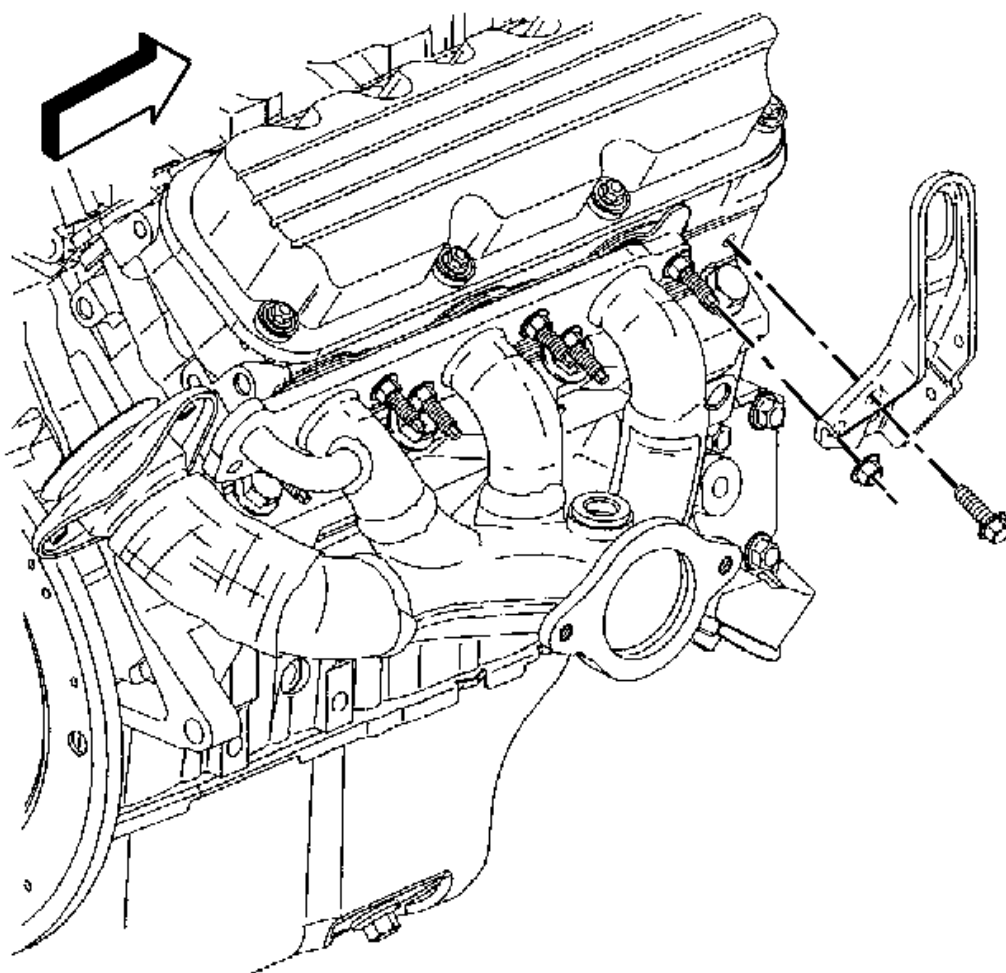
Removing/Installing Right Engine Lift Hook Bracket
